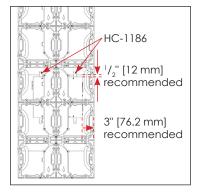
Attach PLR Enclosure to Horizontal Mounting Structure
